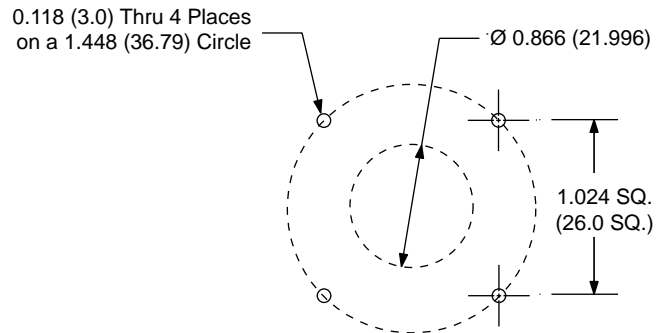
MDrive 14 Microstepping mounting and drill pattern
